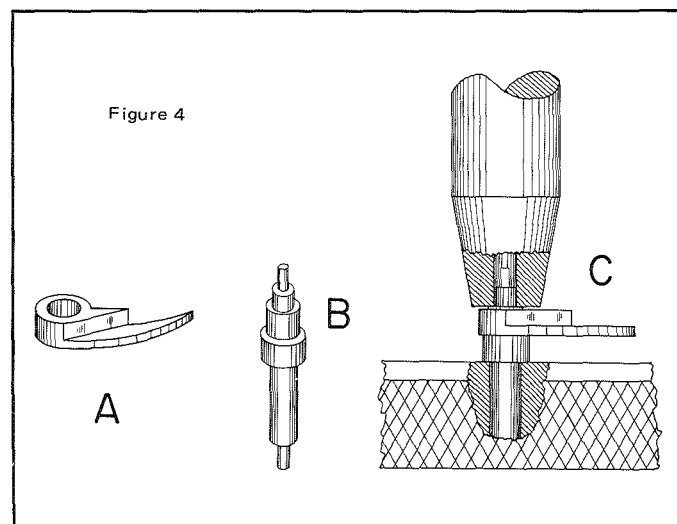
The click finger is made in one piece as is shown in View A, Figure 4. The arbor shown in View B can be a riveted type or a friction type. View C, Figure 4 shows a staking tool punch being used to rivet an arbor into the click. The punch is a flat faced hole punch. The hub on the arbor rests on the die plate of the staking tool in a hole that just clears the body of the arbor for the riveting process. If the arbor is of the friction type, then it can be pressed into the click with a friction jewelng tool. A friction arbor can also be staked into the click by the use of a staking tool.
